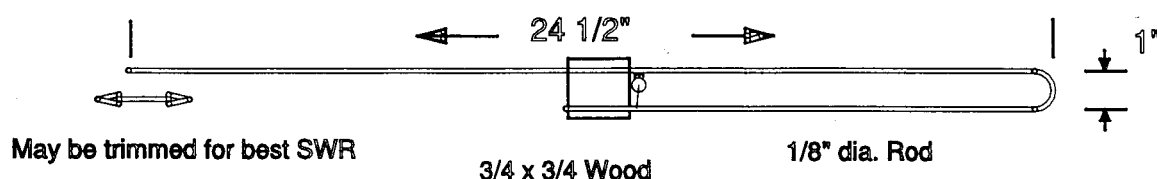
Driven element dimension details for the 222-MHz Cheap Yagi. You'll find the rest of the dimensions for the three-, four-, and six-element versions in Table 2.
